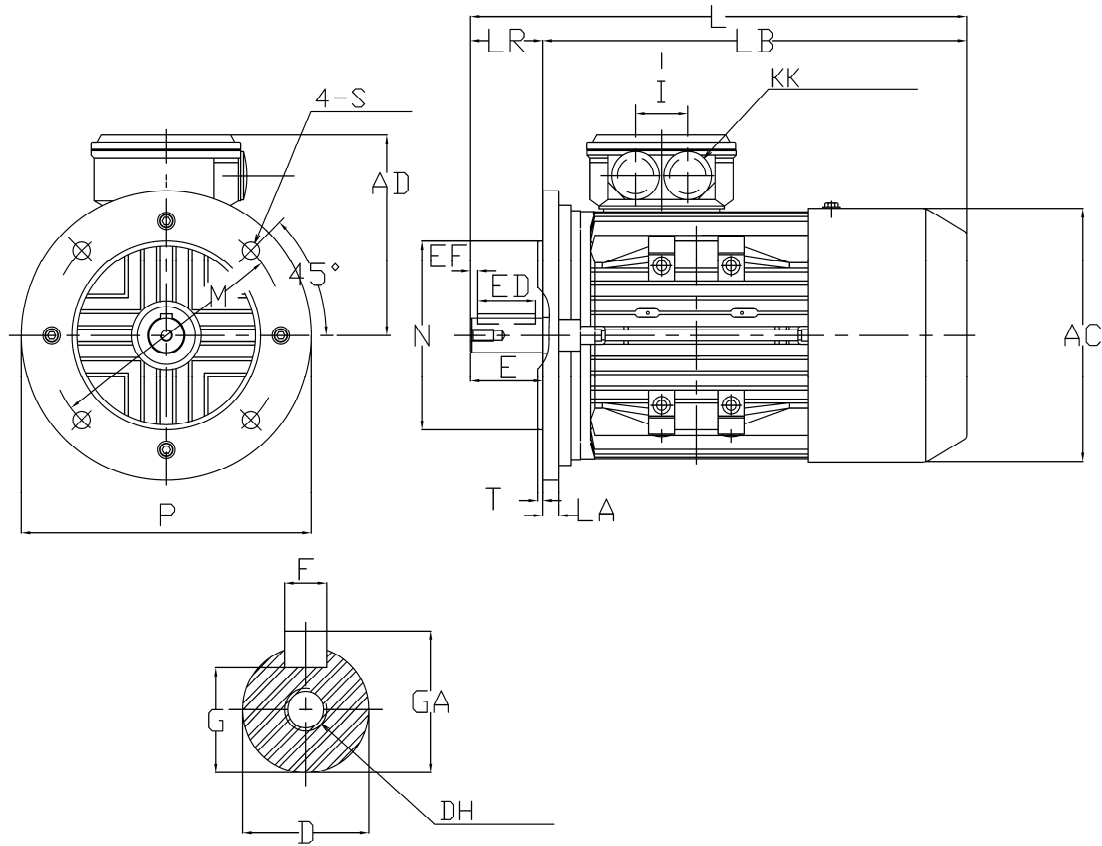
Outline drawing of aluminium design, flange version, mounting B5, frame size 63 - 160 (sample)
